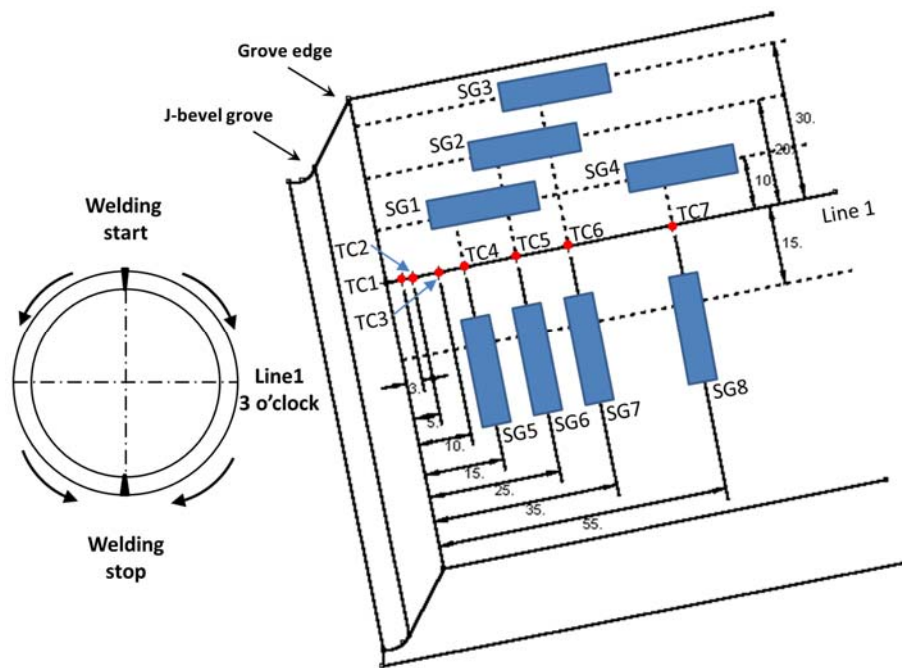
The layout of the thermocouples and strain gauges on pipe outer surface
